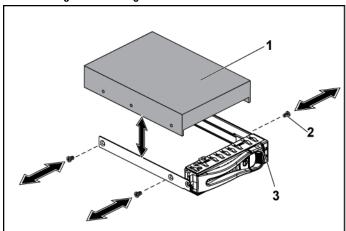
Removing and Installing a Hard Drive from the Hard-Drive Carrier
